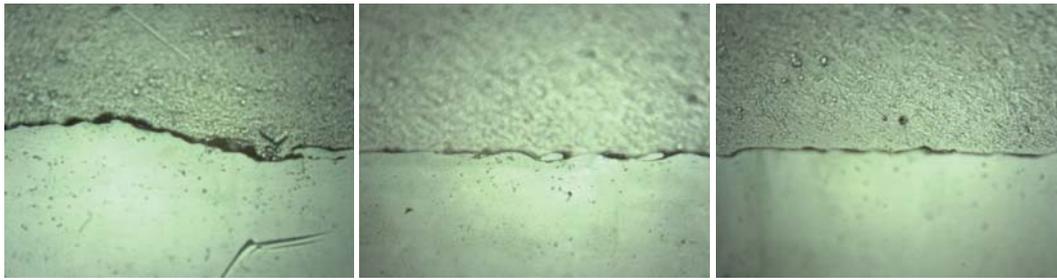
Microstructure of steel–titanium joint obtained by explosion welding (magnification $\times 400$)
